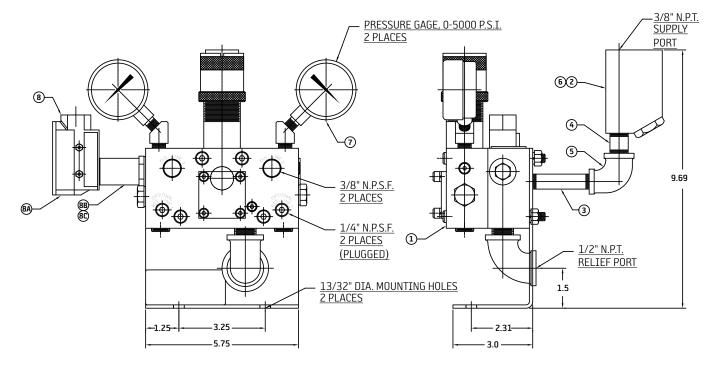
DR460A(Arrangement 1) Reversing Valve and Bracket Mounting Assembly (DR459), with Line Strainer(LS03120) for Grease Non-Return Systems. DR460B (Arrangement 2) Reversing Valve Bracket Mounting Assembly (DR459), with Line Strainer (LS03106) for Oil Non-Return Systems.
